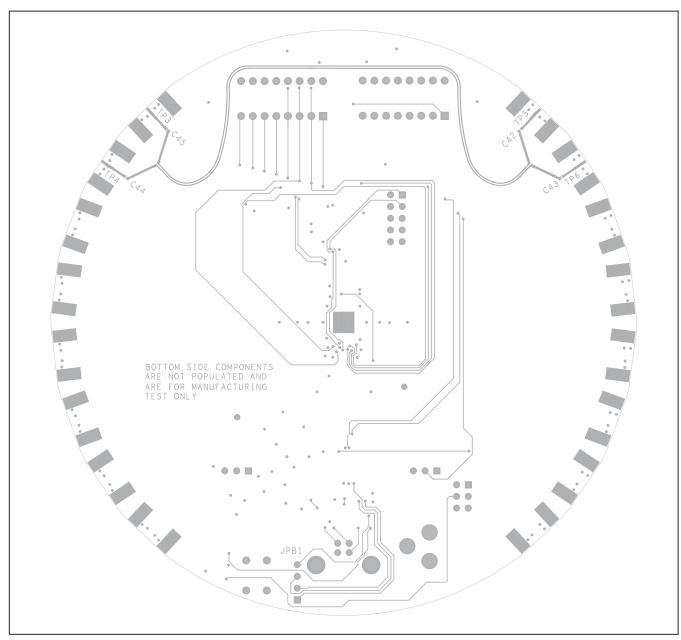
MAX3987 EV Kit Component Placement Guide—Solder Side (Sheet 2 of 2)
